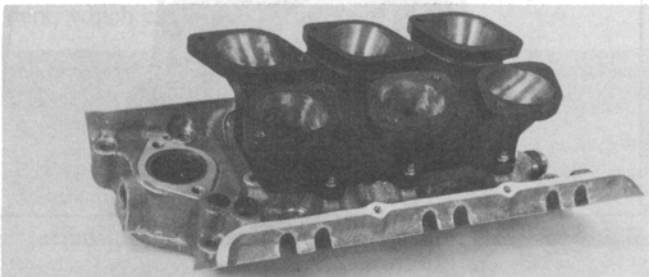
Fuel injection manifold with Weber carburetor adapter.
